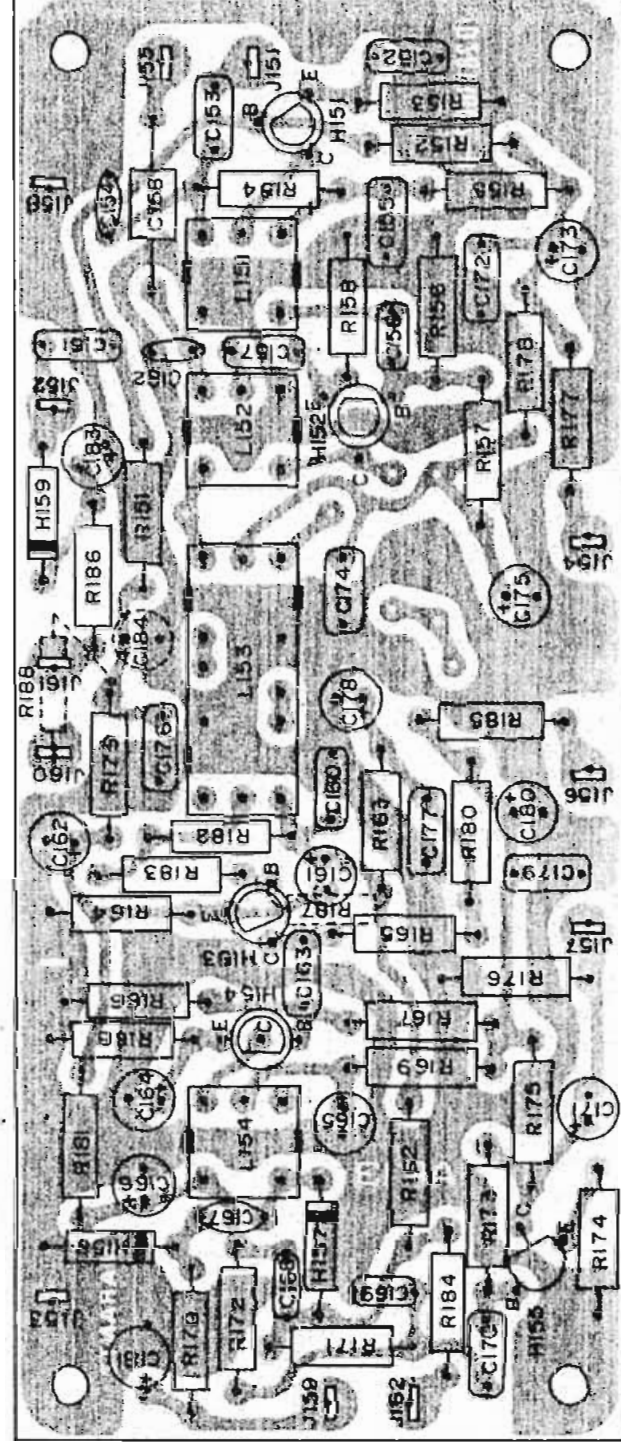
AM Tuner Unit Assembly P150 Component Locations
